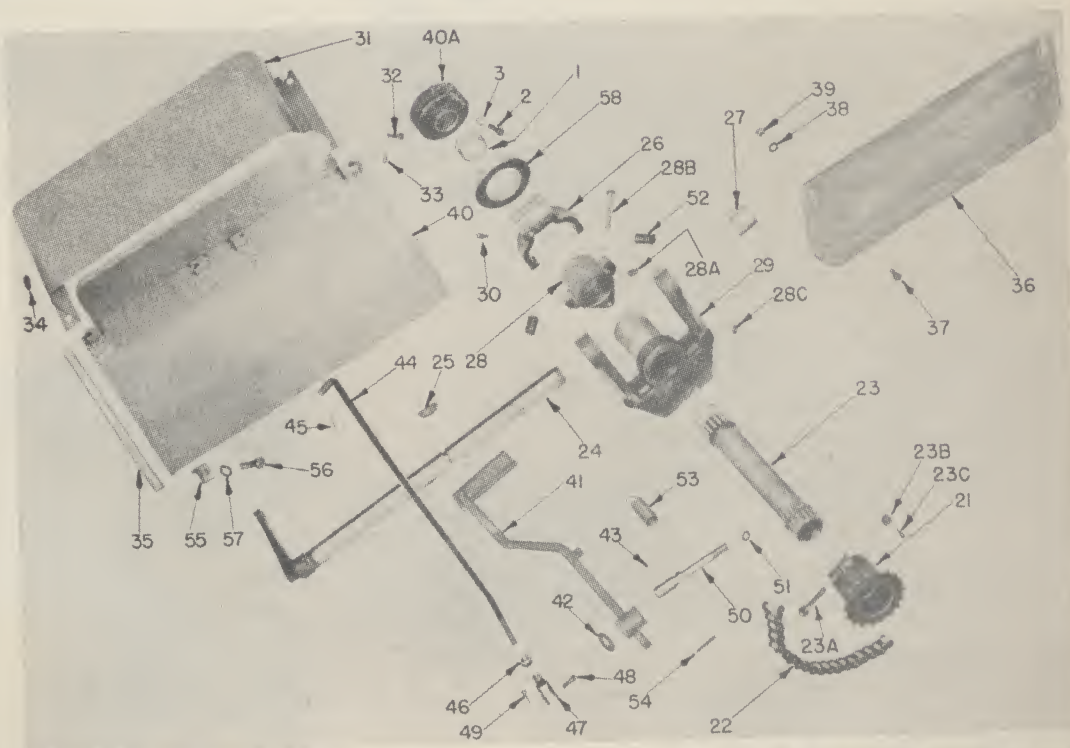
Components of main clutch control system. Dust shield (36) is mounted vertically to steel adaptor plate at rear of engine block.
